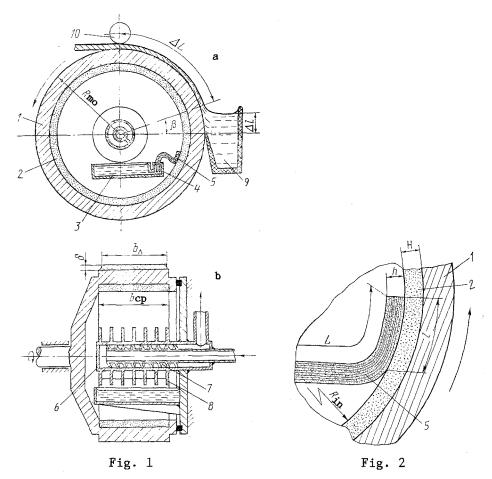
Sketch of device for producing sheet metal in strip form: a) frontal view; b) side view.
